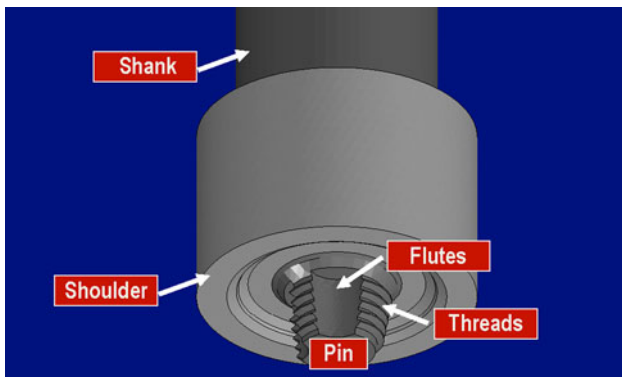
Typical friction stir welding (FSW) tool used for joining of aluminum alloys
